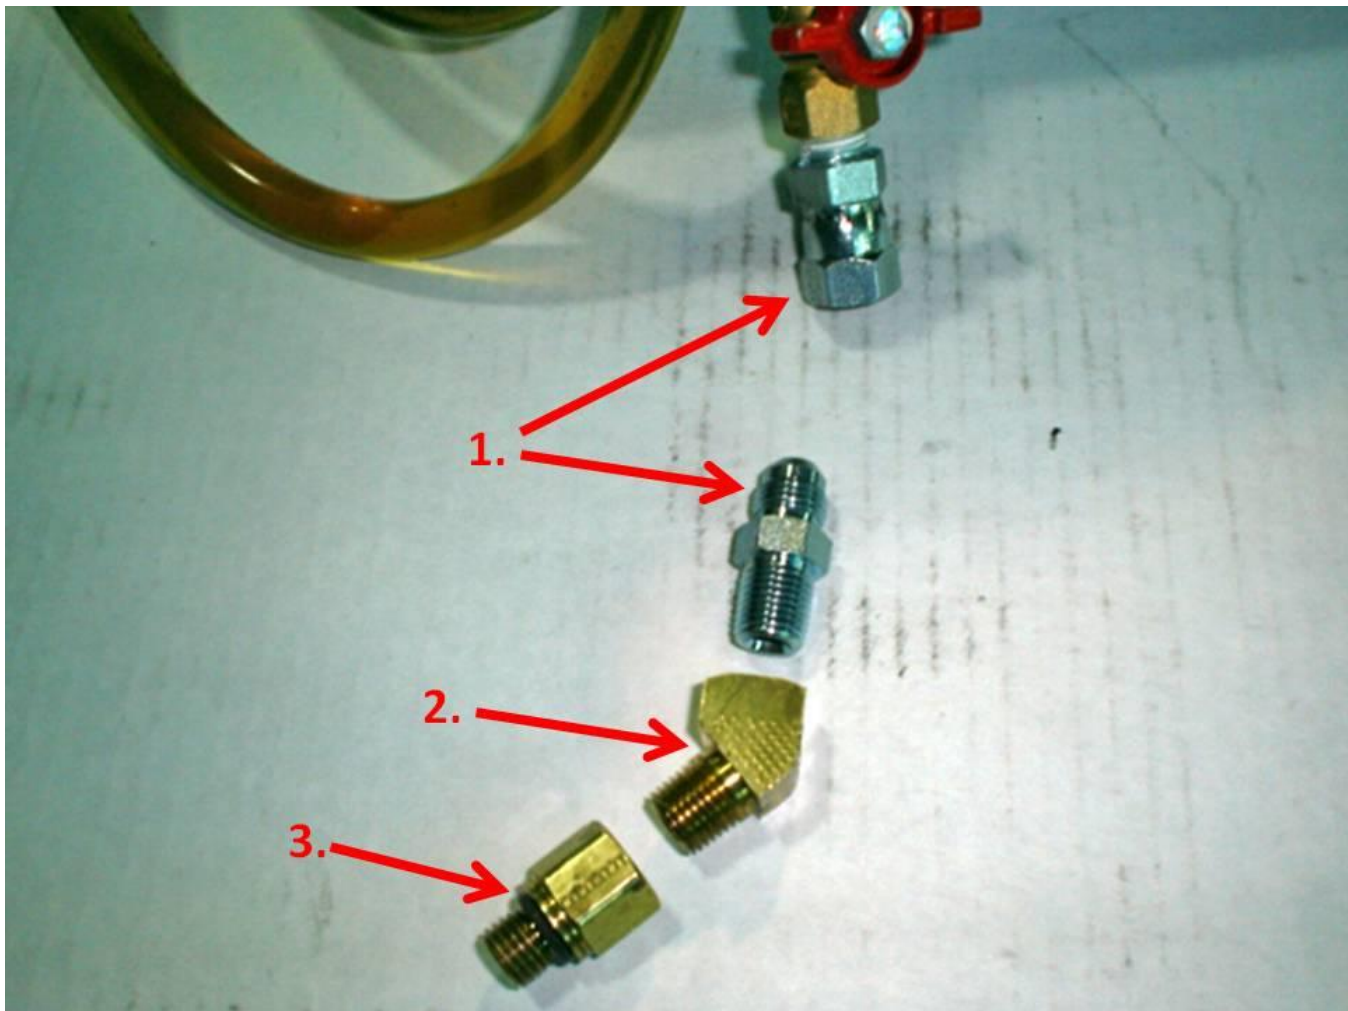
Hose Fittings Used to Attach Oil Feed Line to Engine Oil Filter Header
